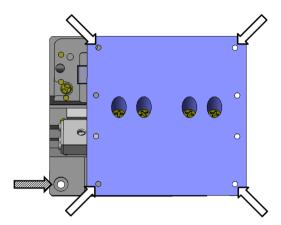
Threaded holes in the motion platform for mounting stacked systems (white arrows) and one of three countersunk holes in the base body of the U-521 (hatched arrow)
